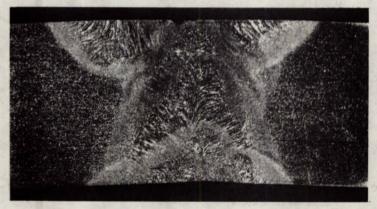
From weld specimen MR6. Gas metal-arc process, E60S-3 electrode, argon-oxygen shielding, flat position.
